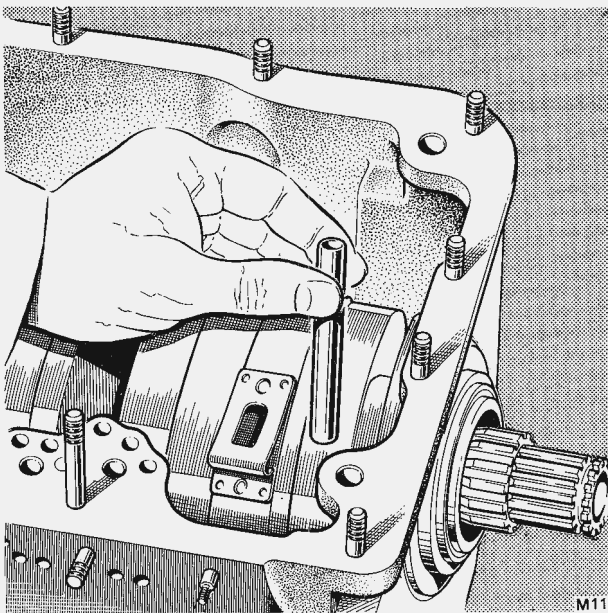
WITHDRAWING THE PUMP FEED PIPE
